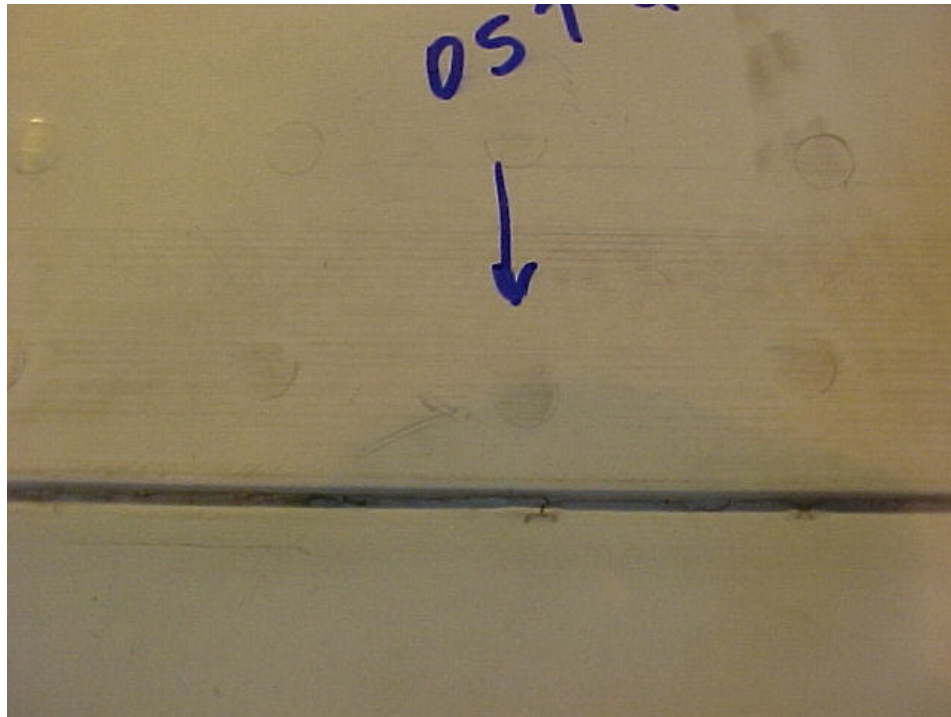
Photograph showing erratic rivet alignment, making some fasteners uninspectable with Rivet Check due to proximity to the edge.
